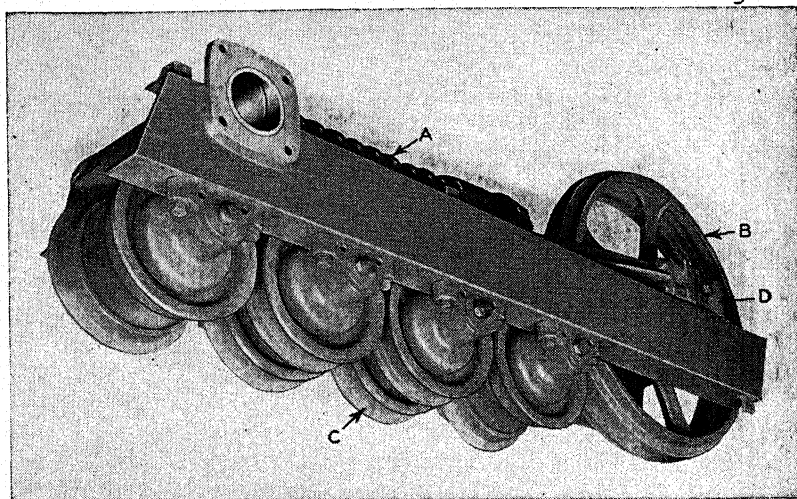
Track roller frame with helical recoil spring, "A", and adjustable front idler, "B".
